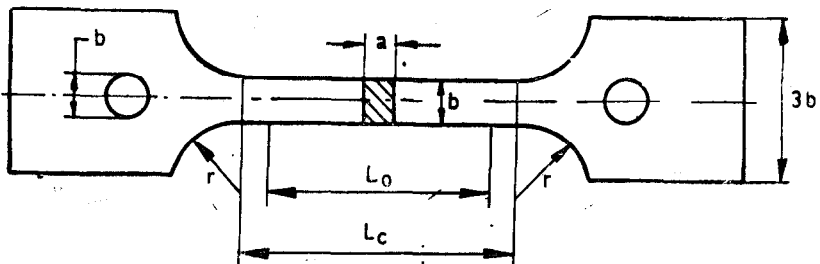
TEST SAMPLE OF RECTANGULAR CROSS-SECTION
